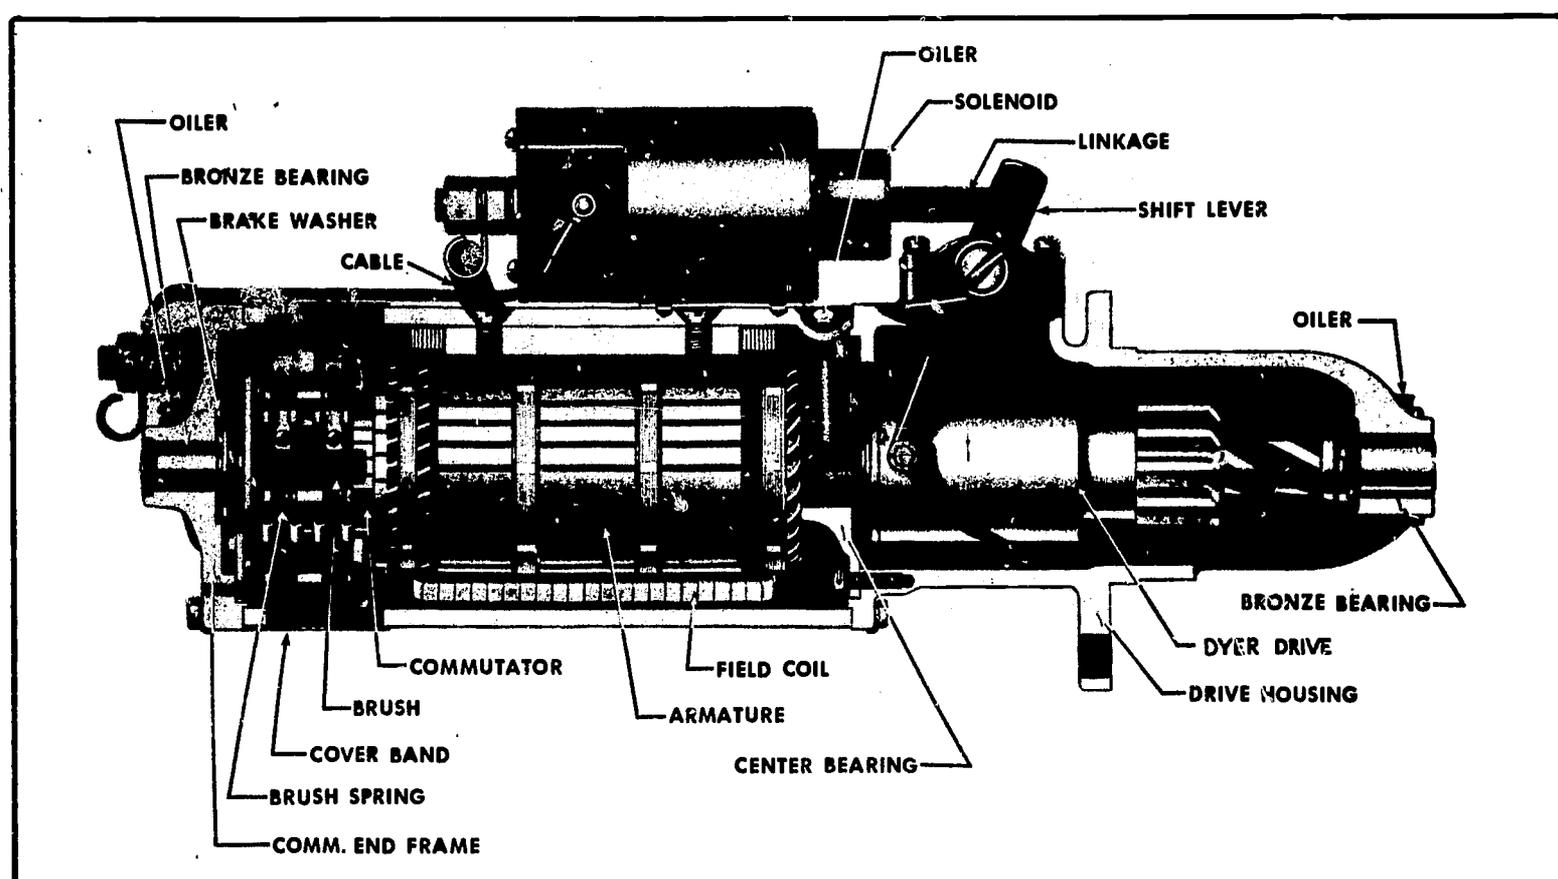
Cutaway view of a Dyer Cranking Motor.
